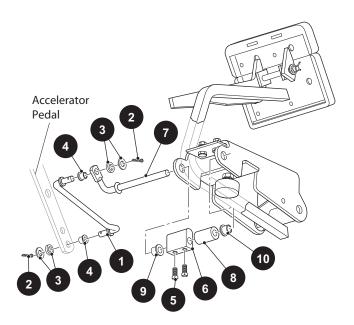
Parking Brake Release Linkage and Kick-Off Cam Removal and Installation.
